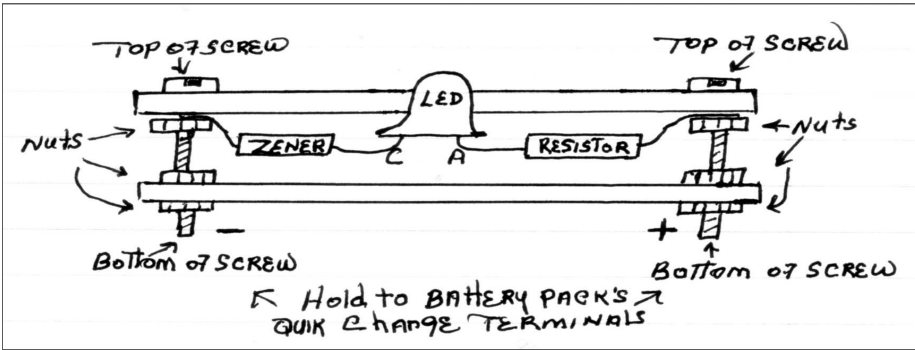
Assembly outline for the battery monitor/checker, showing placement of parts. LED protrudes through hole drilled in top board.
